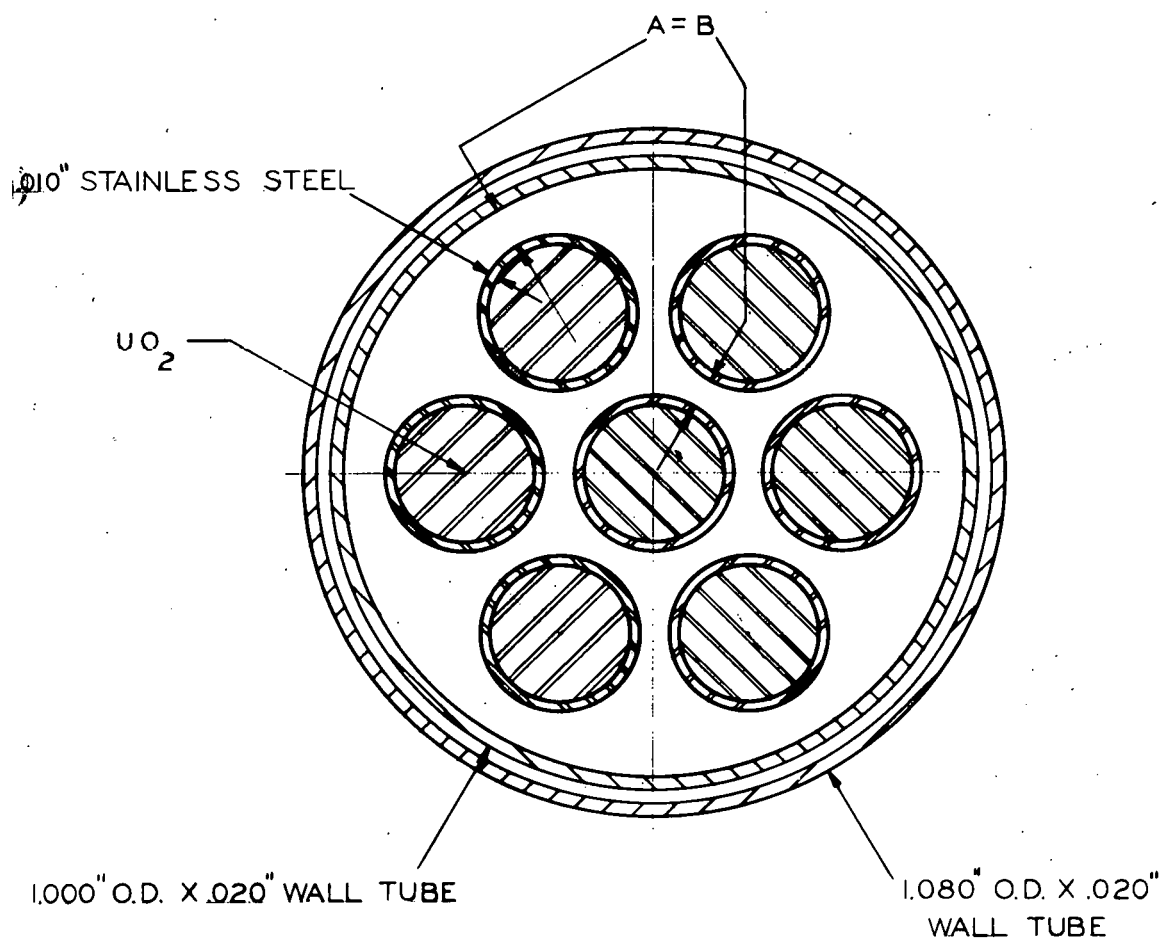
Low Enrichment Superheater Fuel (43-024-085)
